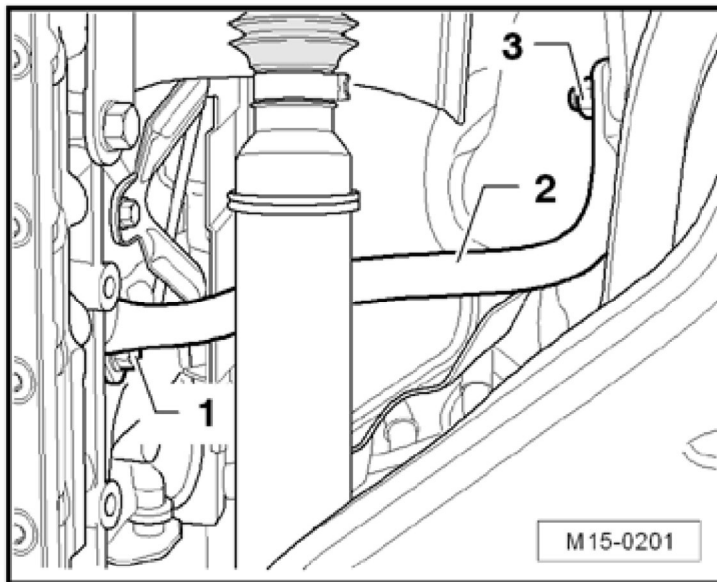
Removing Bolt And Brace For Exhaust Manifold
